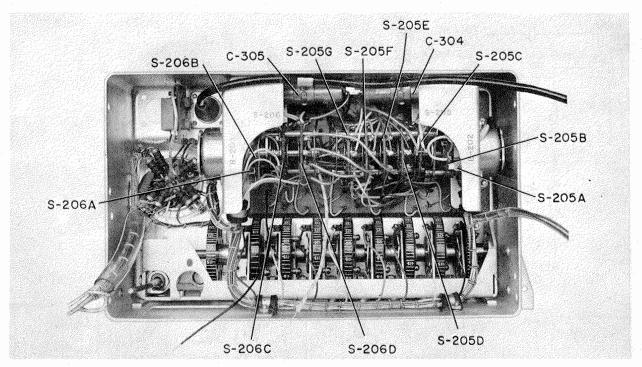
Radio Receiver R-608/ARC-49—Front Panel Assembly, Rear View
